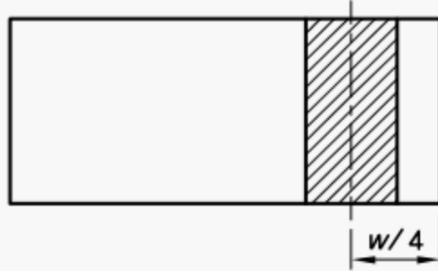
HEXAGONAL BAR—LOCATION OF TEST PIECES FOR TENSILE TESTING
